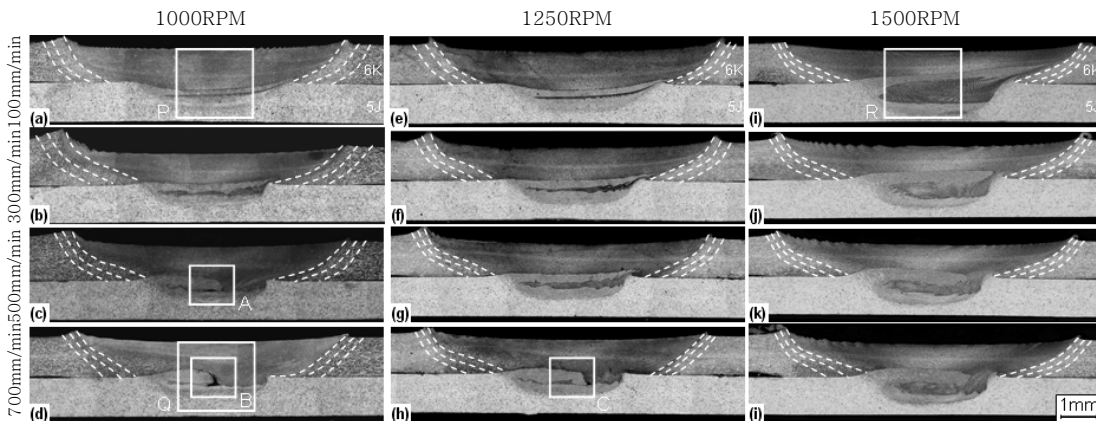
Macrostructures of joints with welding speed(100mm/min~700mm/min) at rotation speed of 1000rpm, 1250rpm and 1500rpm
